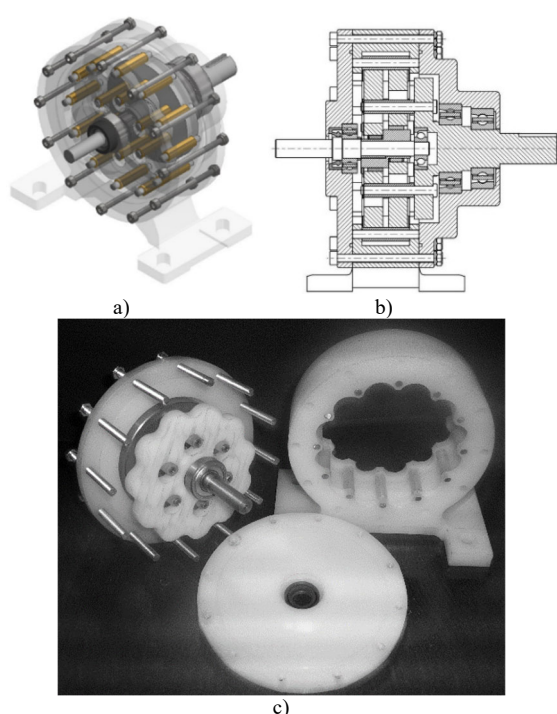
Tested cycloid reducer: a) 3D model; b) cross-section c) manufactured reducer
